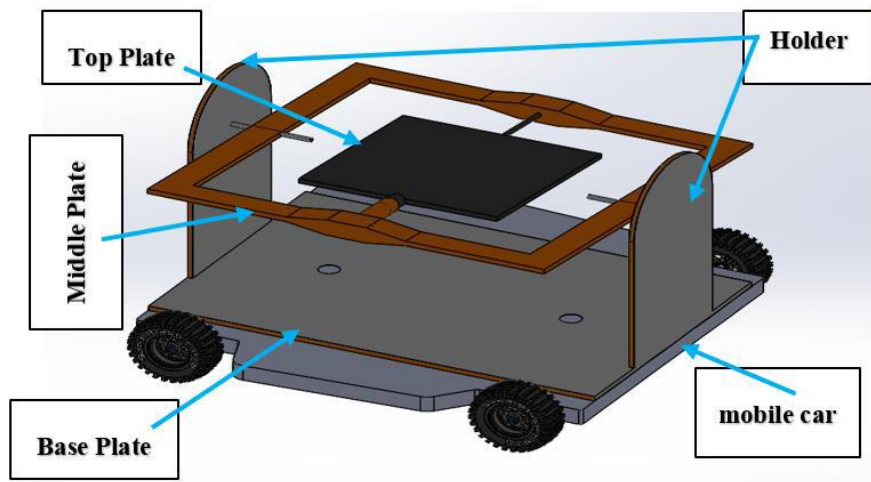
CAD drawing by Bushra Amer Tawfeeq [4]
